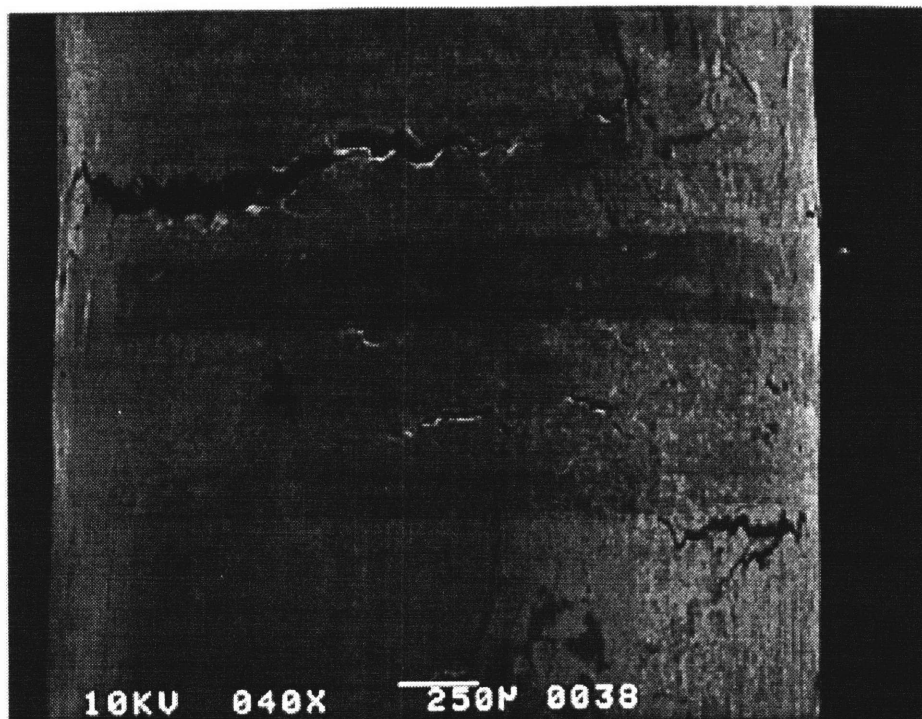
Side of specimen 2003 (CP 304,AJ9139,furnace sensitized at 650°C/10hr,0 n/m²) away from the fracture surface depicting extensive cracking.
